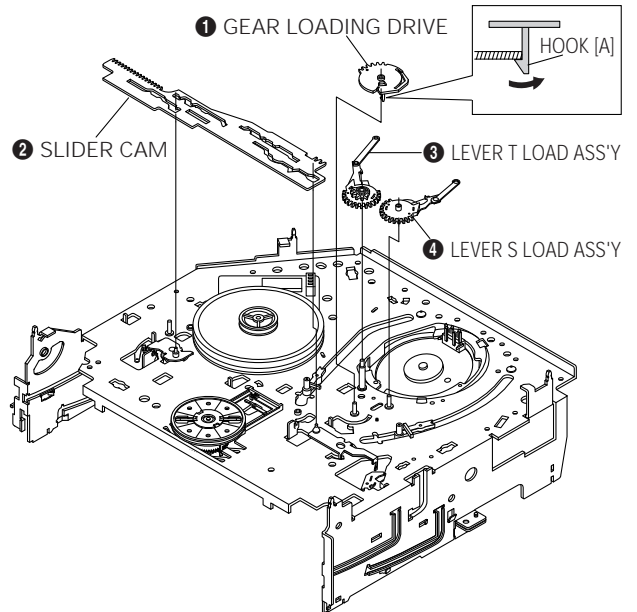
Gear Loading Drive, Slider Cam, Lever T, S Load Ass'y Removal
